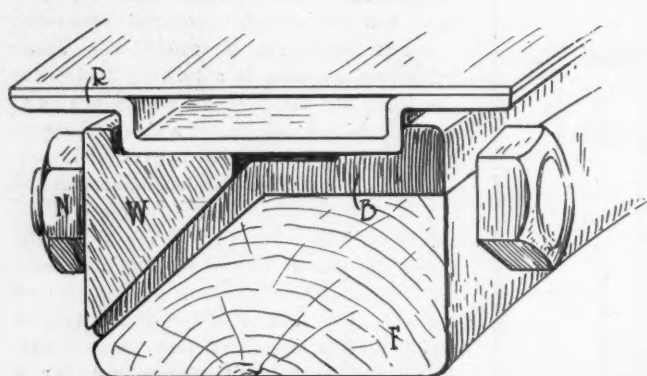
FISK DEMOUNTABLE RIM, IN WHICH A BOLT PASSES THROUGH THE FELLOE F, THE BAND B AND THE WEDGE RING W, CLAMPING THE RIM R IN PLACE
